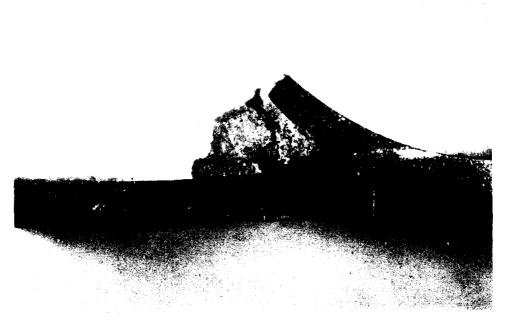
Section of Flame Welded Joint in a Copper Fire Main
